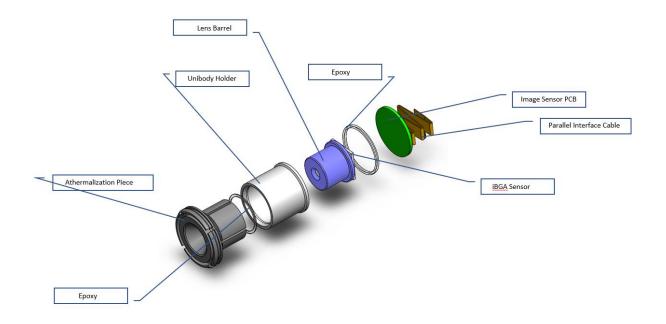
Exploded View of the Final Camera Assembly Prototype
